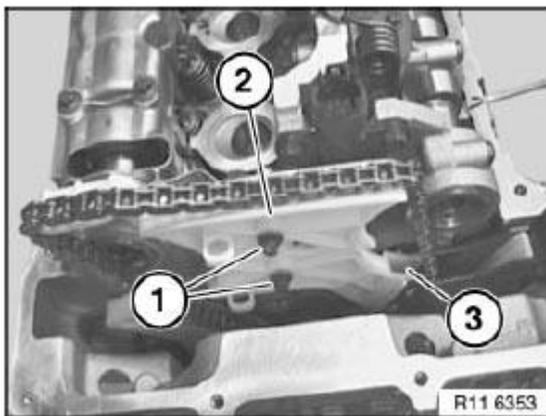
Identifying Timing Chain Module With Mounting Screws
